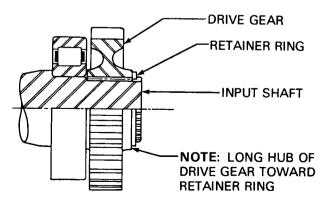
Input shaft, rear bearing, drive gear and snap ring.
